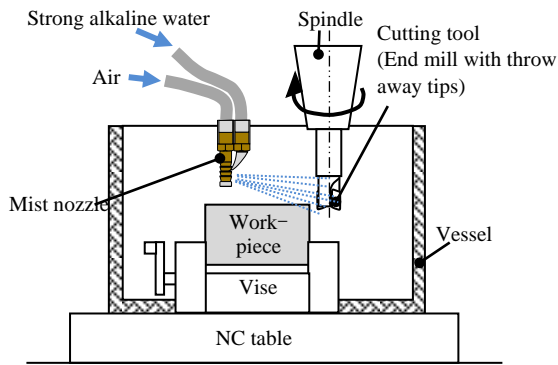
Experimental set-up for measurement of tool life and surface roughness
